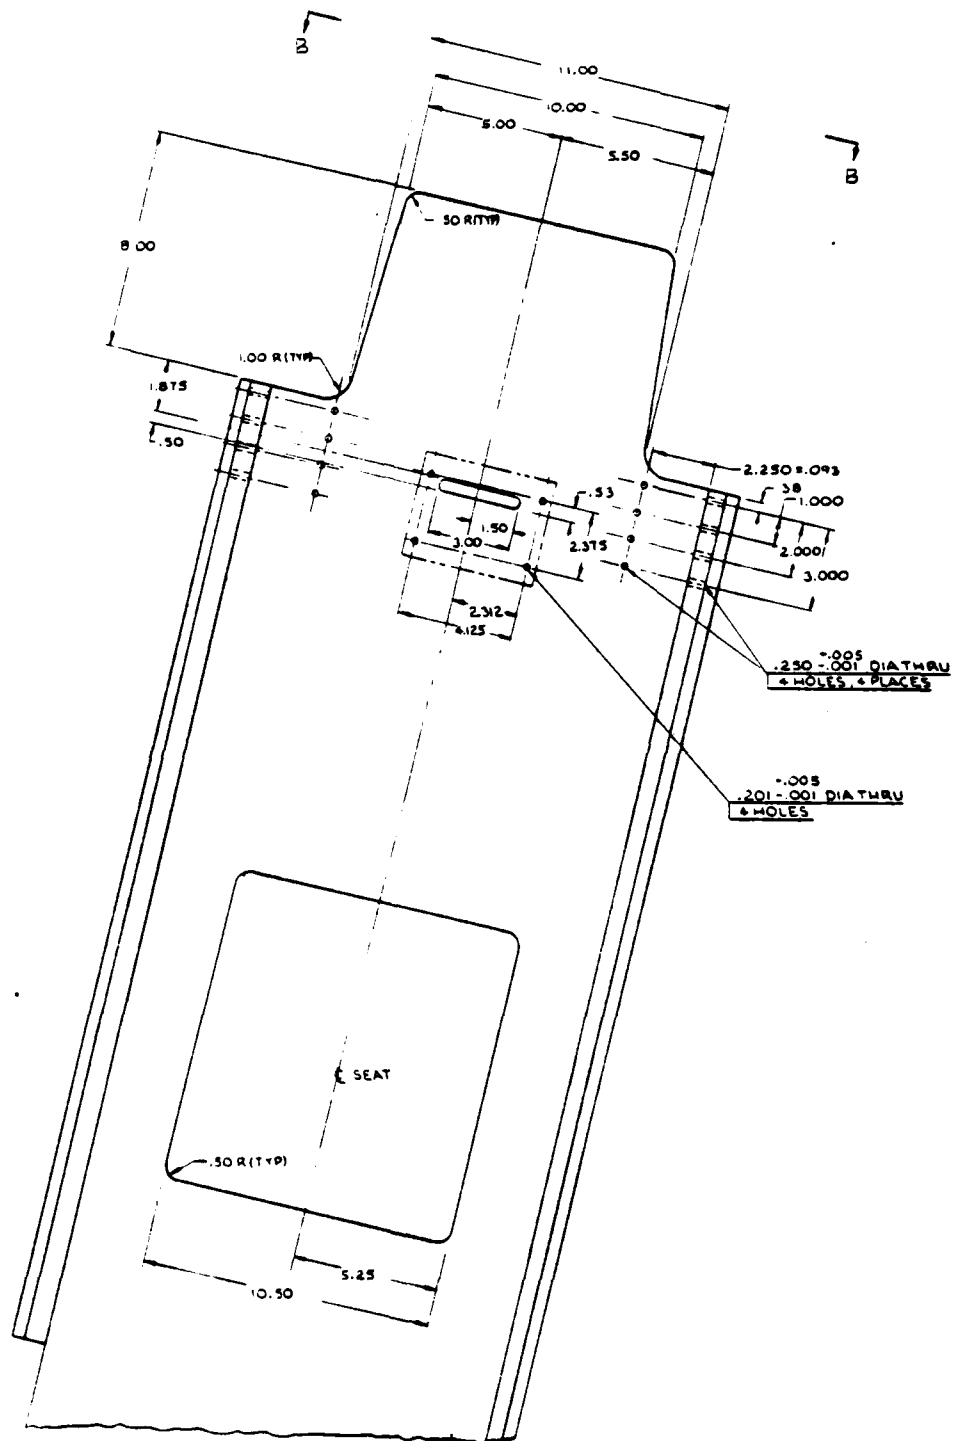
Dimensionalized Drawing of MPES Seat Structure (Rear View)
